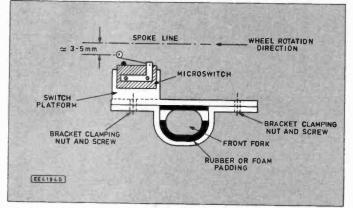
How the completed bracket and microswitch are fitted to the front fork. The roller should clear the nearer spokes by the amount indicated.
